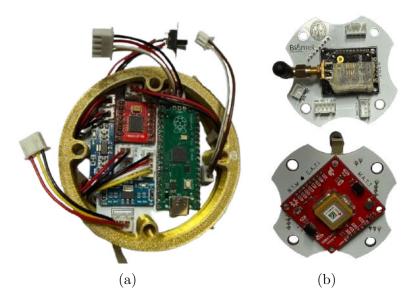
upper part of the CanSat manufactured: a) PCB1 and b) PCB2.
